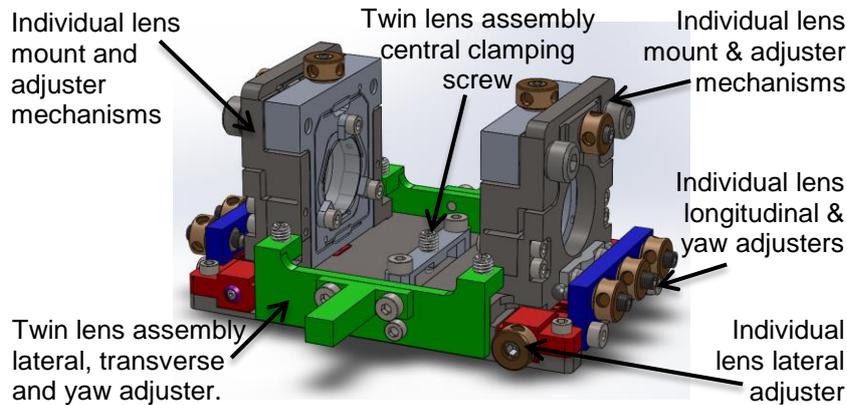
Isometric view of a lens pair assembly from the non-classical imaging system design.
